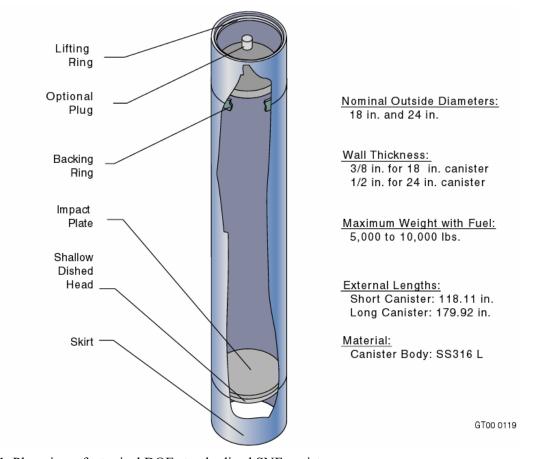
Plan view of a typical DOE standardized SNF canister.
